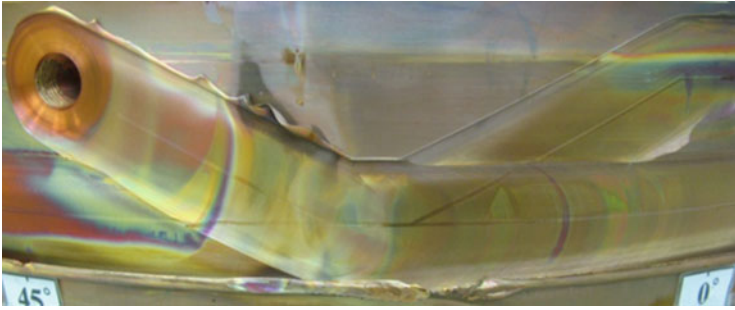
Weld with extensive flash during joint line and parking sequences
